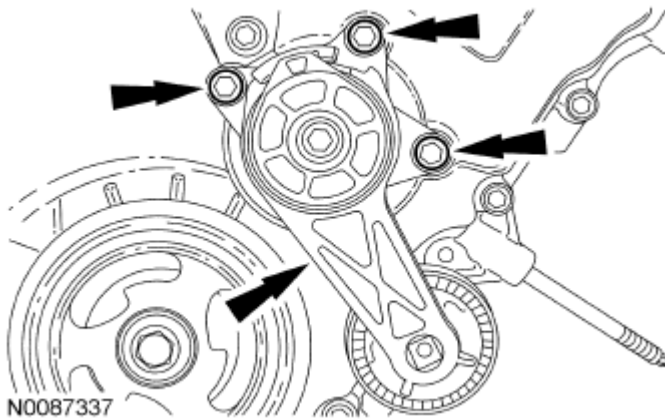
Locating Accessory Drive Belt Tensioner With Bolts
